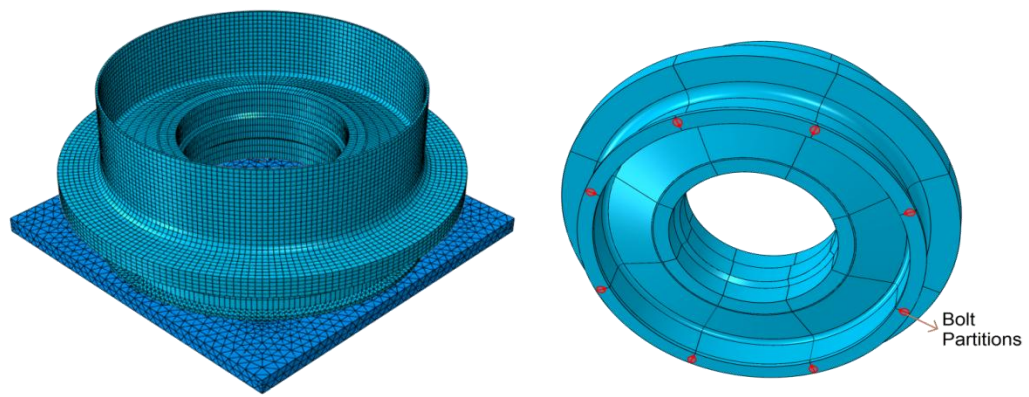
Finite element model of the casing with fixture plate (a) bottom view of casing showing partitions used as bolt surfaces which are tied to fixture plate
